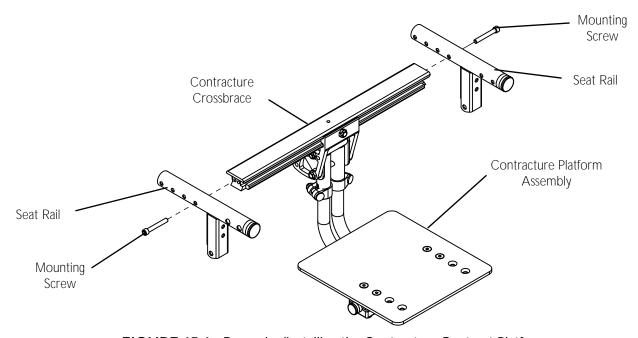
Removing/Installing the Contracture Footrest Platform
